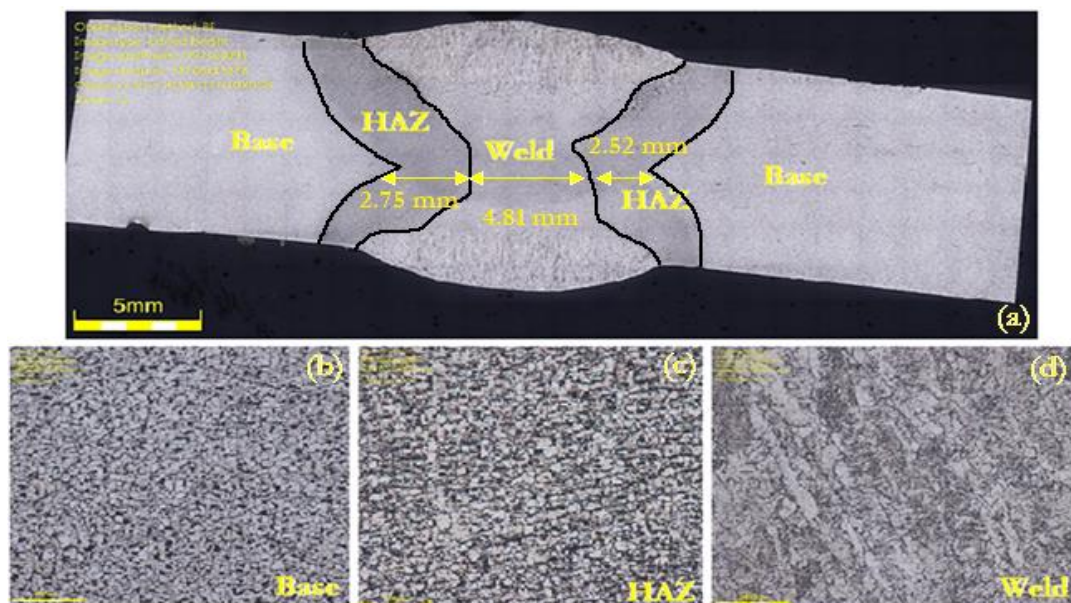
Micrographs of a Weld Joint made using a Brand (R) Electrode and showing (a) Weld Profile, (b) Base Metal (BM), (c) Heat Affected Zone (HAZ) and (d) Weld Zone (WZ).
